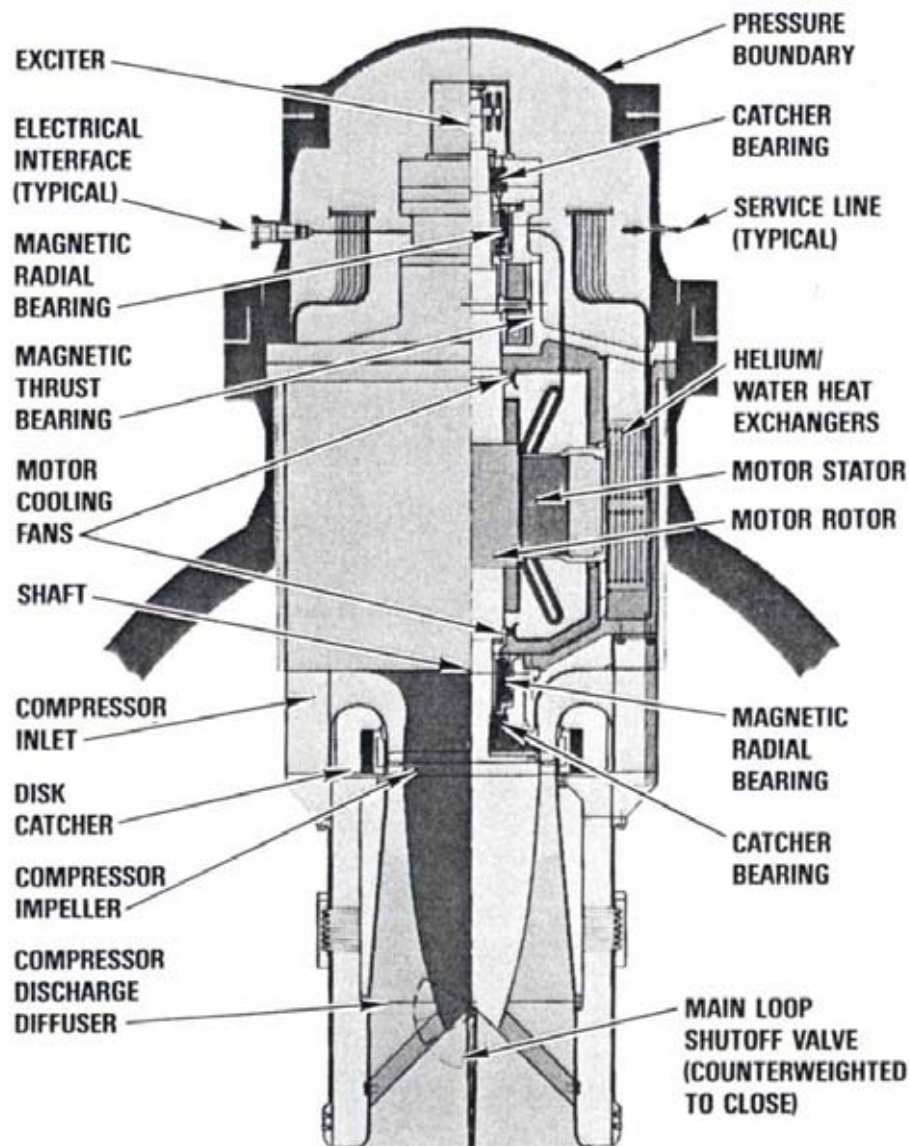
Helium circulator and electric motor drive unit of MHTGR
